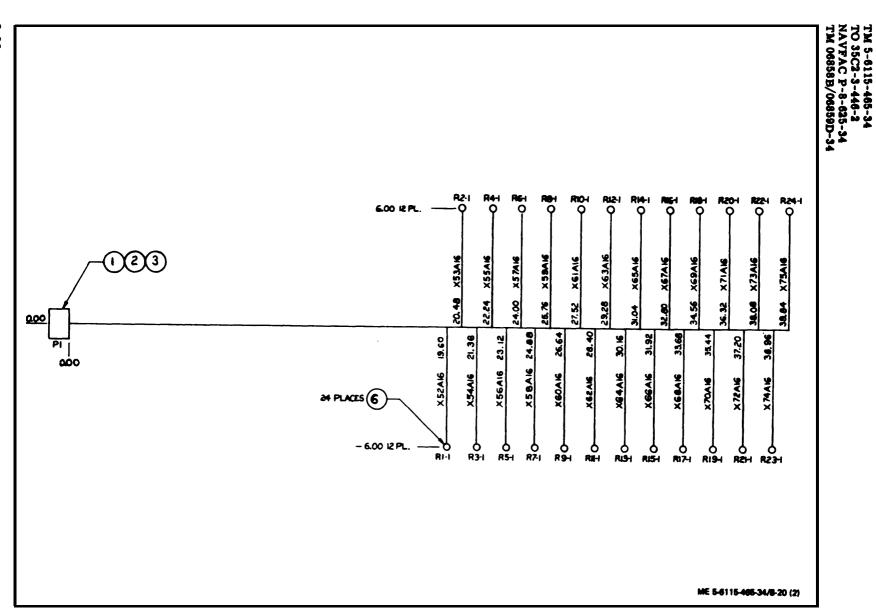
Bottom Load Bank Wiring Harness (Sheet 2 of 2), Drawing No. 72-2825
